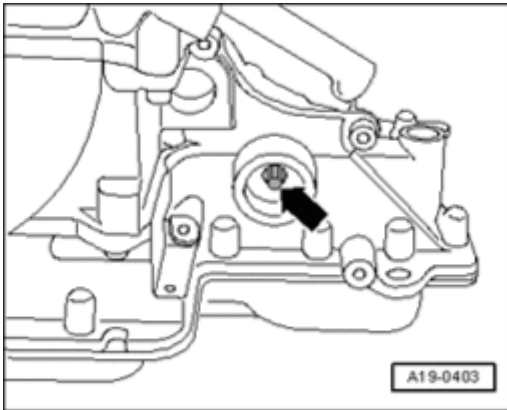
Removing/Installing Drive Shaft For Coolant Pump From Oil Pump
